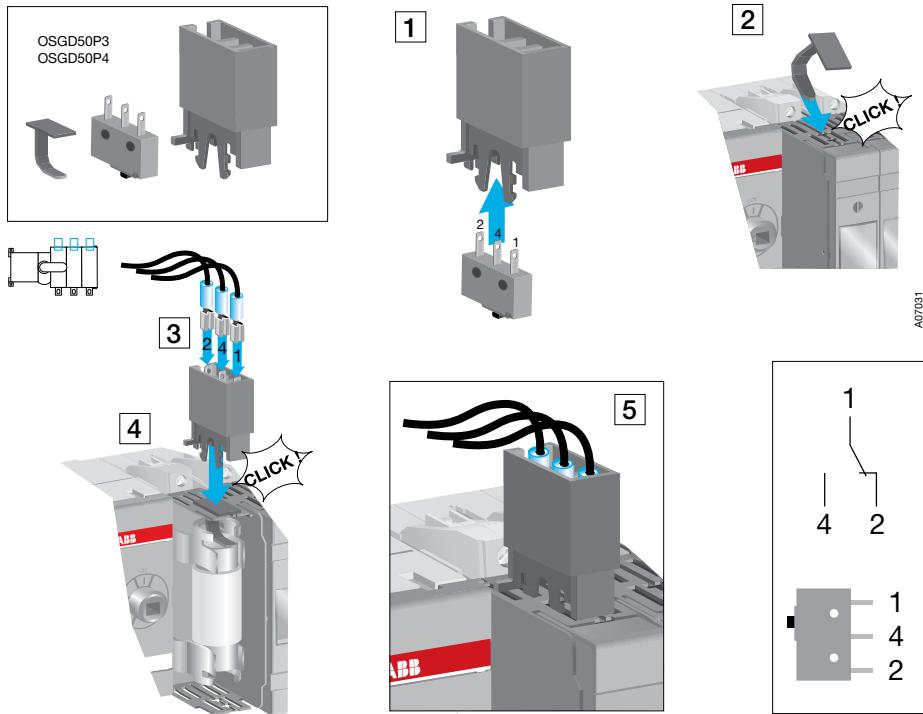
Mounting of the blown fuse indicator (DPMM) on OSM50GF_ type OSGD_ strikers
